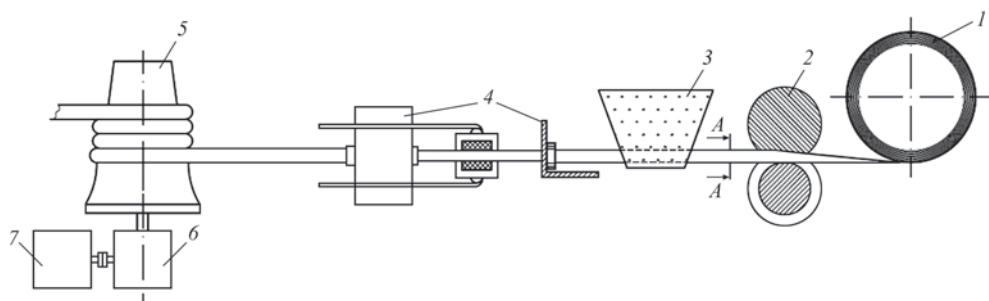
Schematic of powder core wire fabrication: 1 — tape coil; 2 — bending rollers; 3 — powder hopper; 4 — dies; 5 — coiler drum; 6 — reducer; 7 — electric motor
